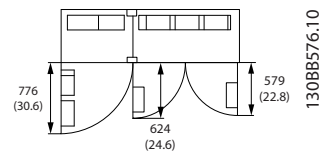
Space in front of IP21/IP54 enclosure type, frame size F12
